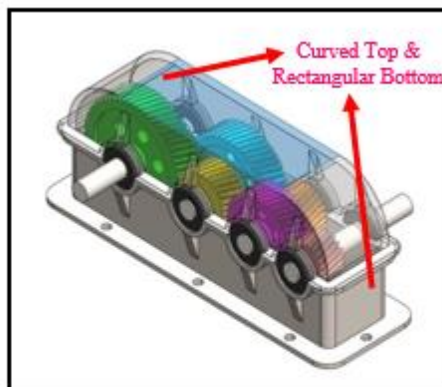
Modified 3D CAD model I for three stage helical gearbox with rib and cover assembly cross sectional view
